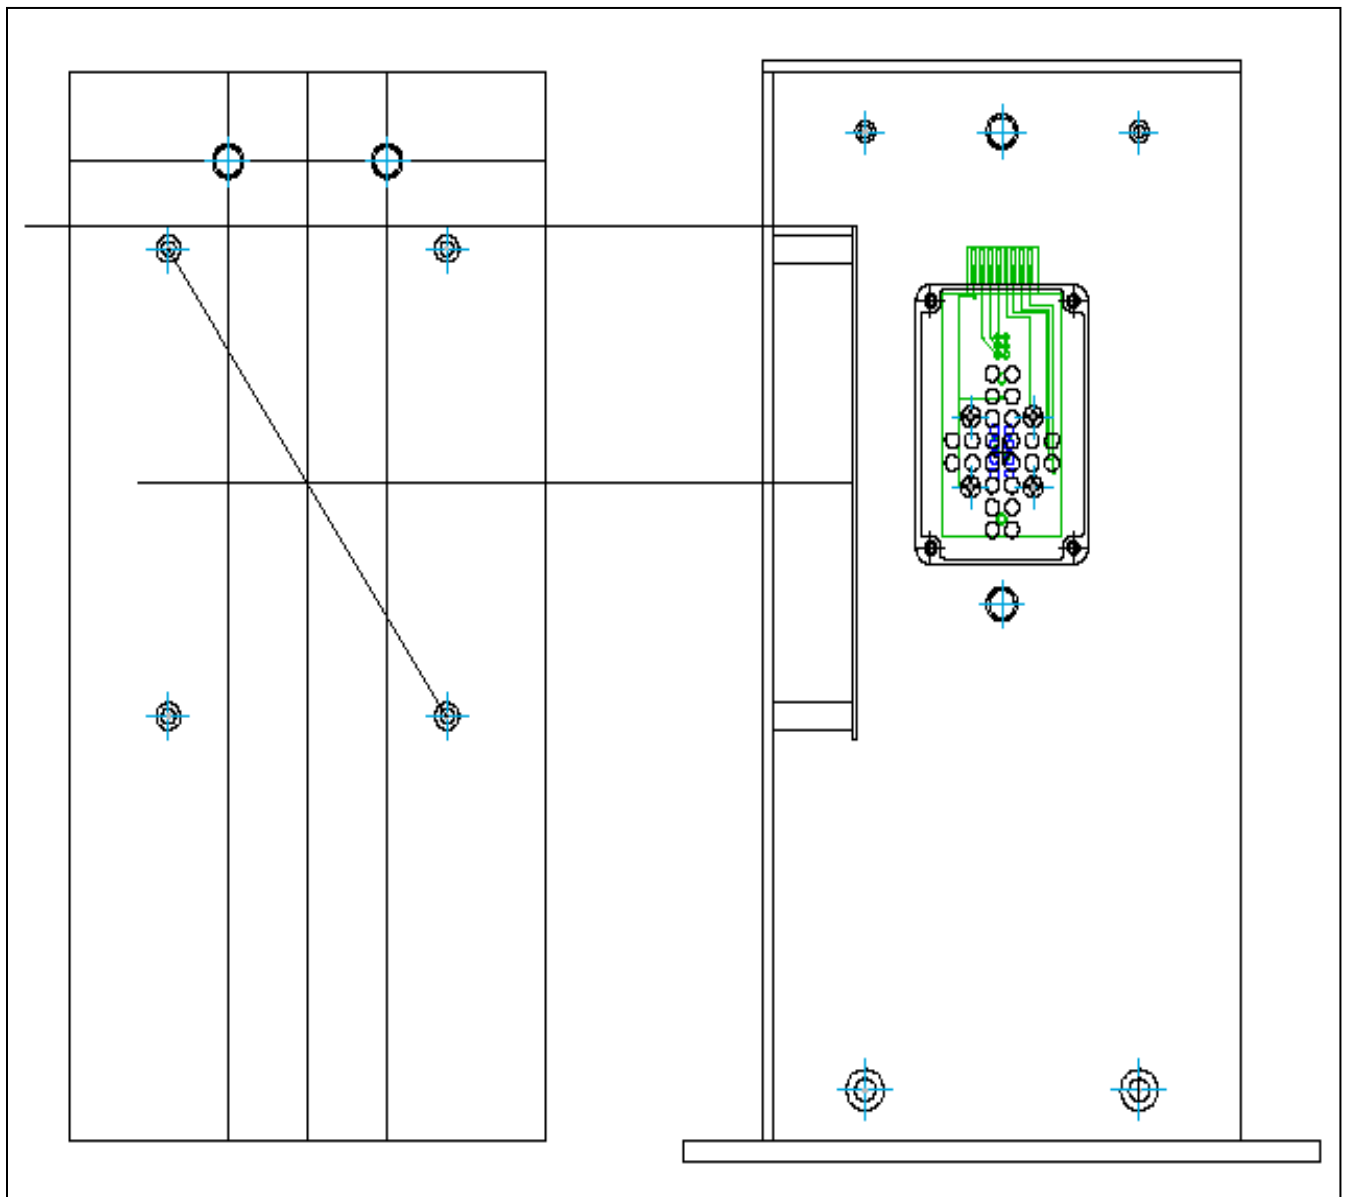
(f) Design for holes on payload body for mounting microcontroller PCB and sensor box
